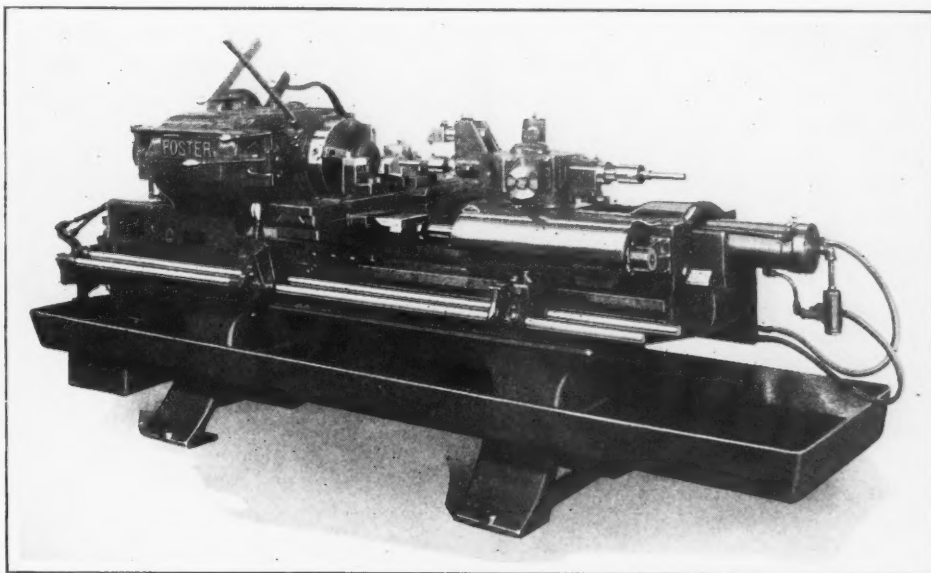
Indexing-turret Type of "Fastermatic" also Built by the Foster Machine Co.
